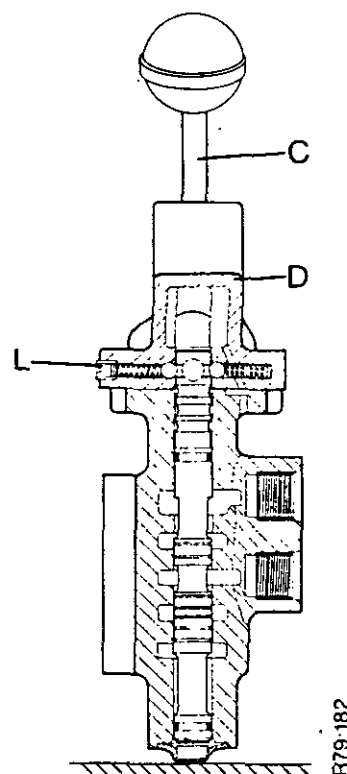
ASSEMBLY OF THE THREE-WAY VALVE
